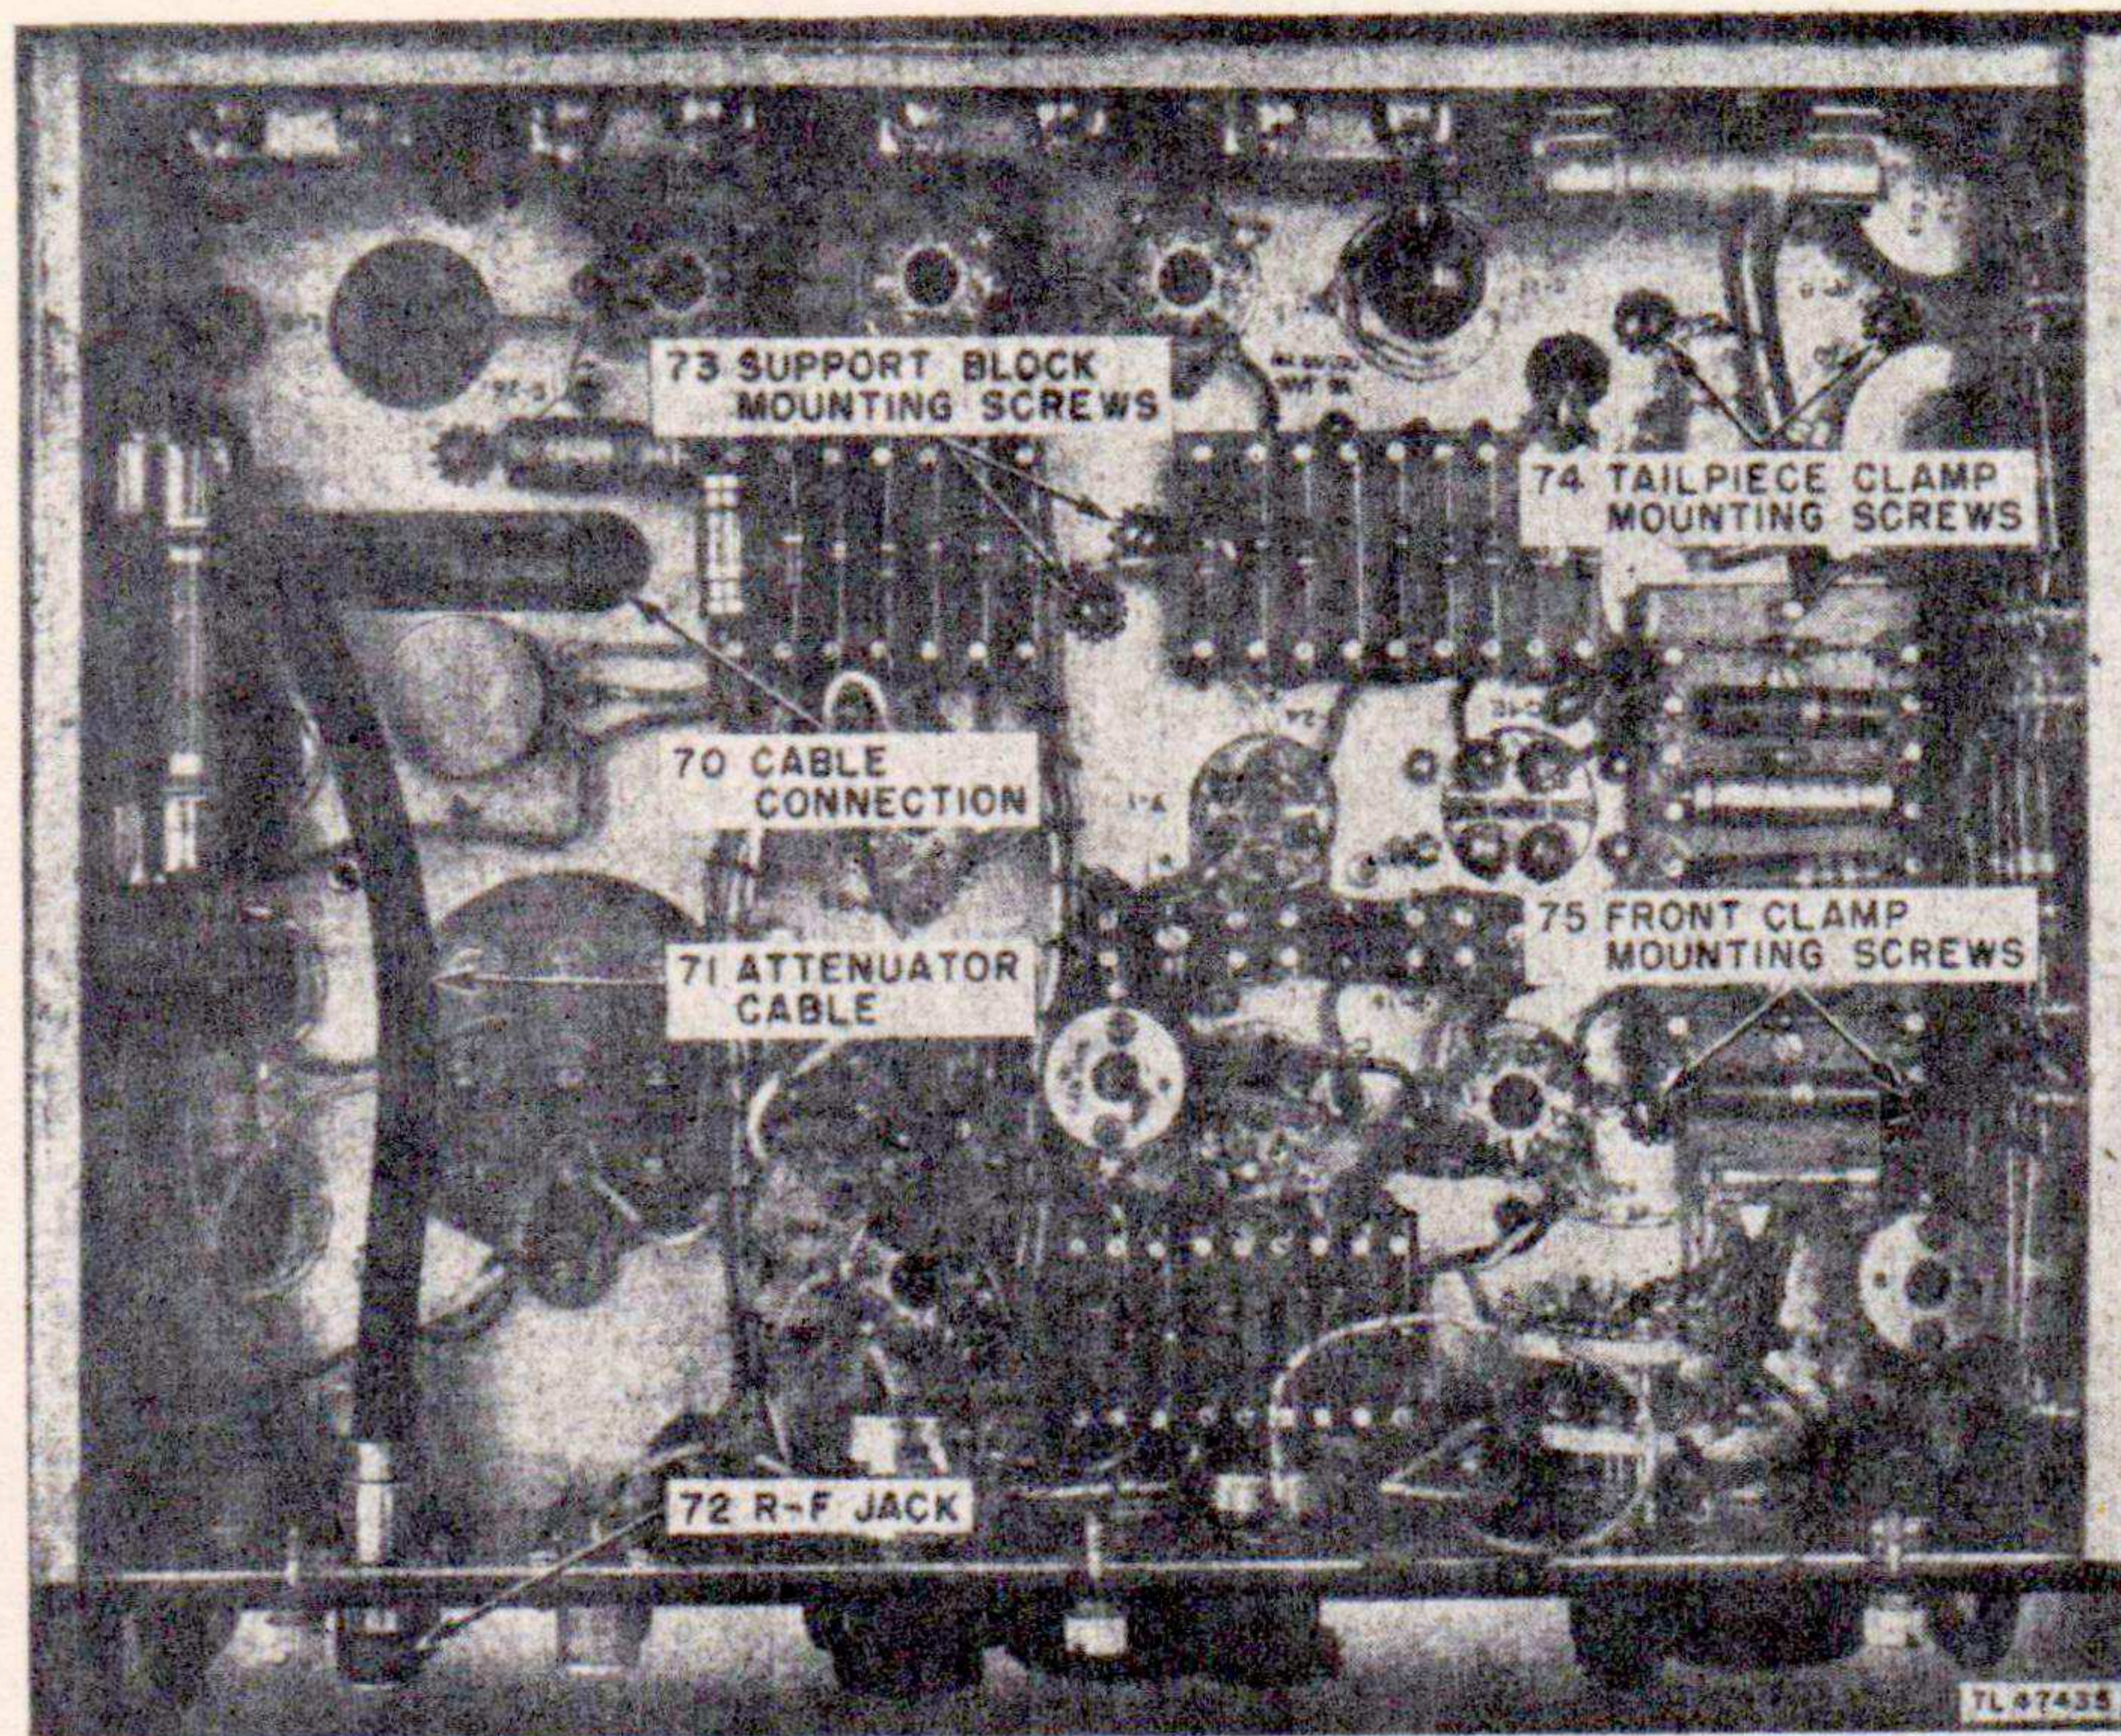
Bottom of chassis, oscillator assembly mounting screws.
